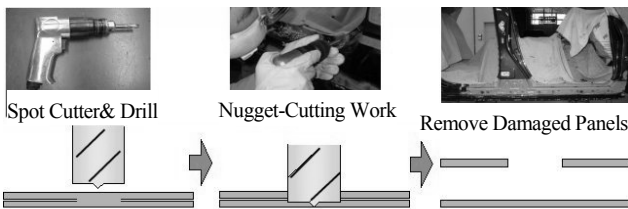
Procedure of Nugget-Cutting Work Using a Spot Cutter to Remove Damaged Panels
